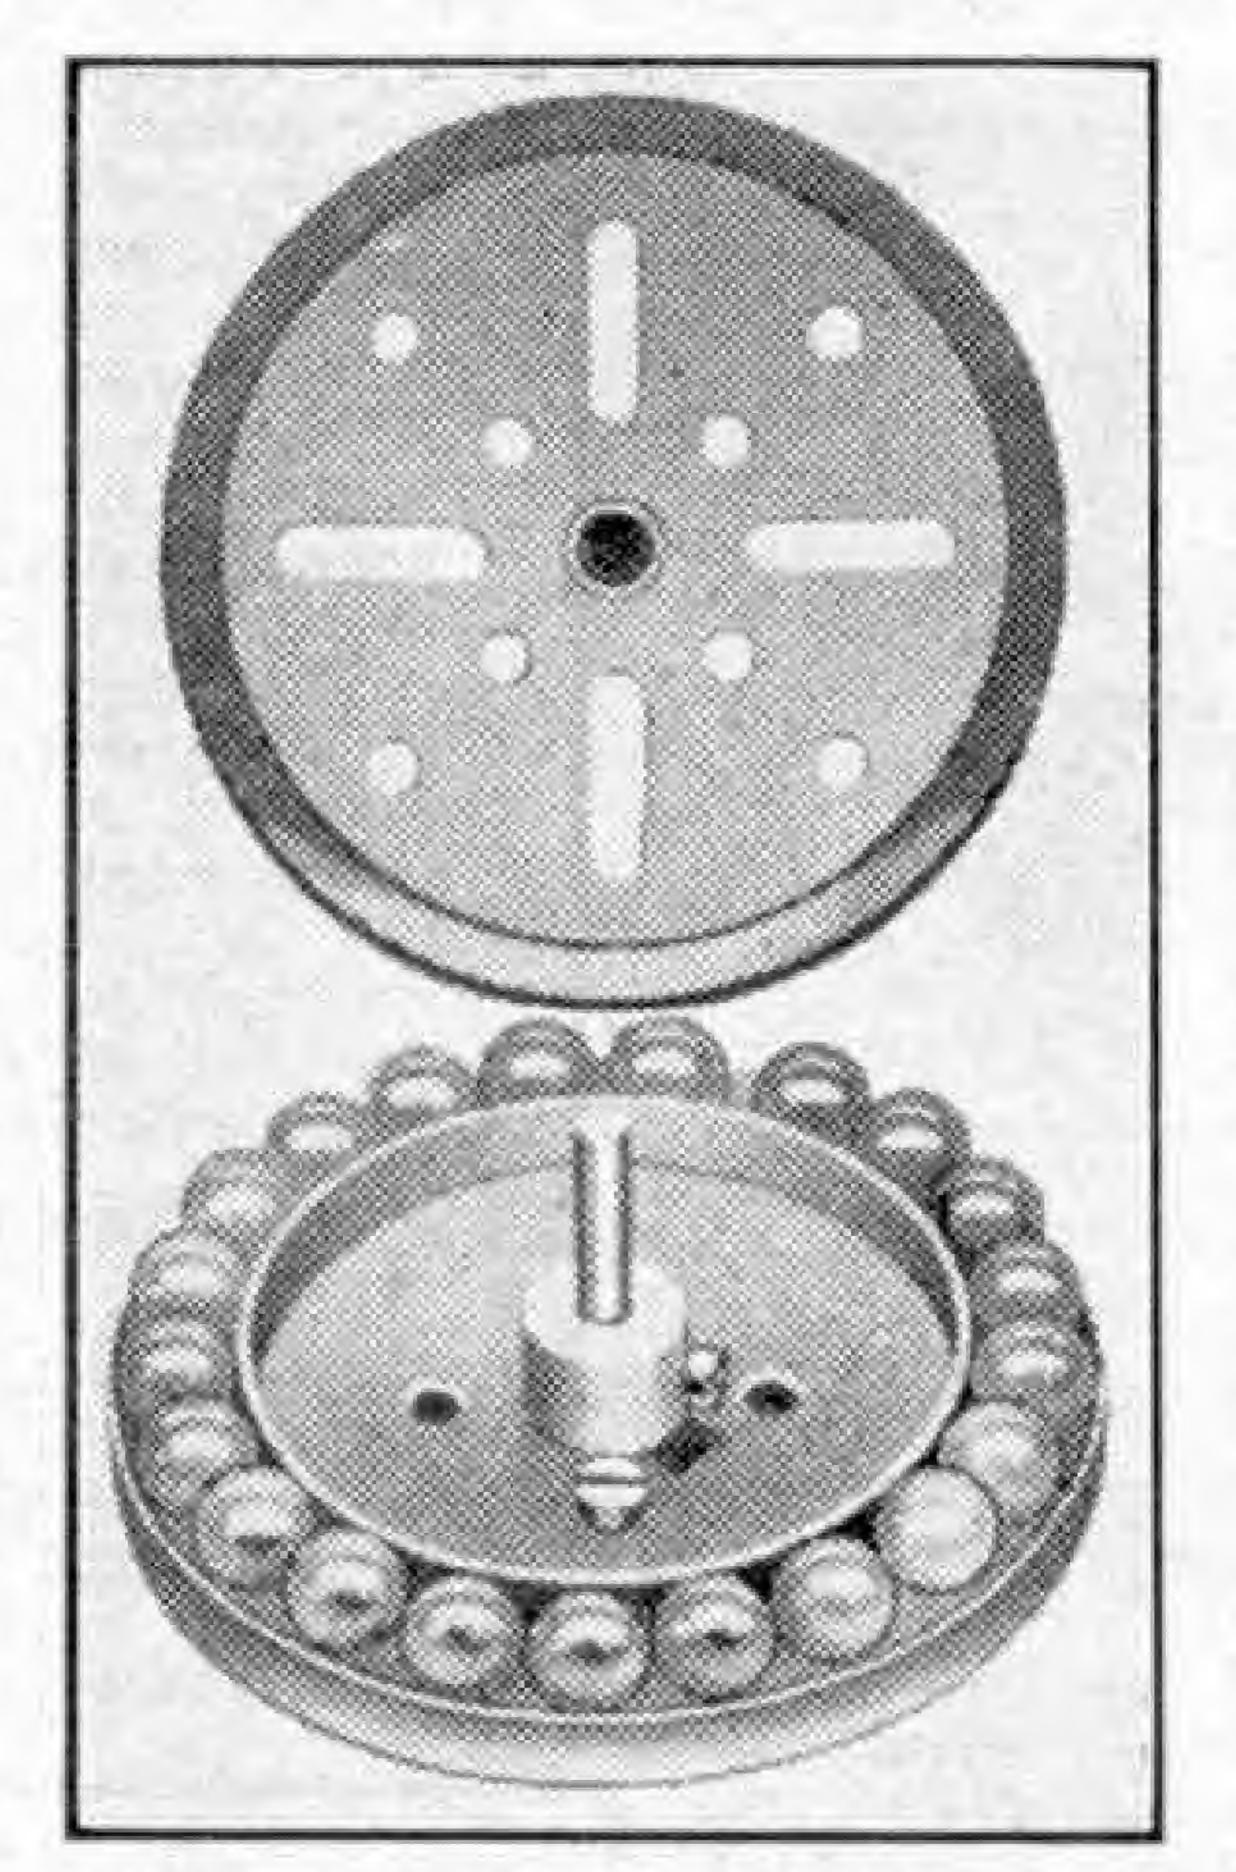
A ball bearing that is easy to assemble and which is useful for supporting the jib of a crane or any other swivelling structure.
